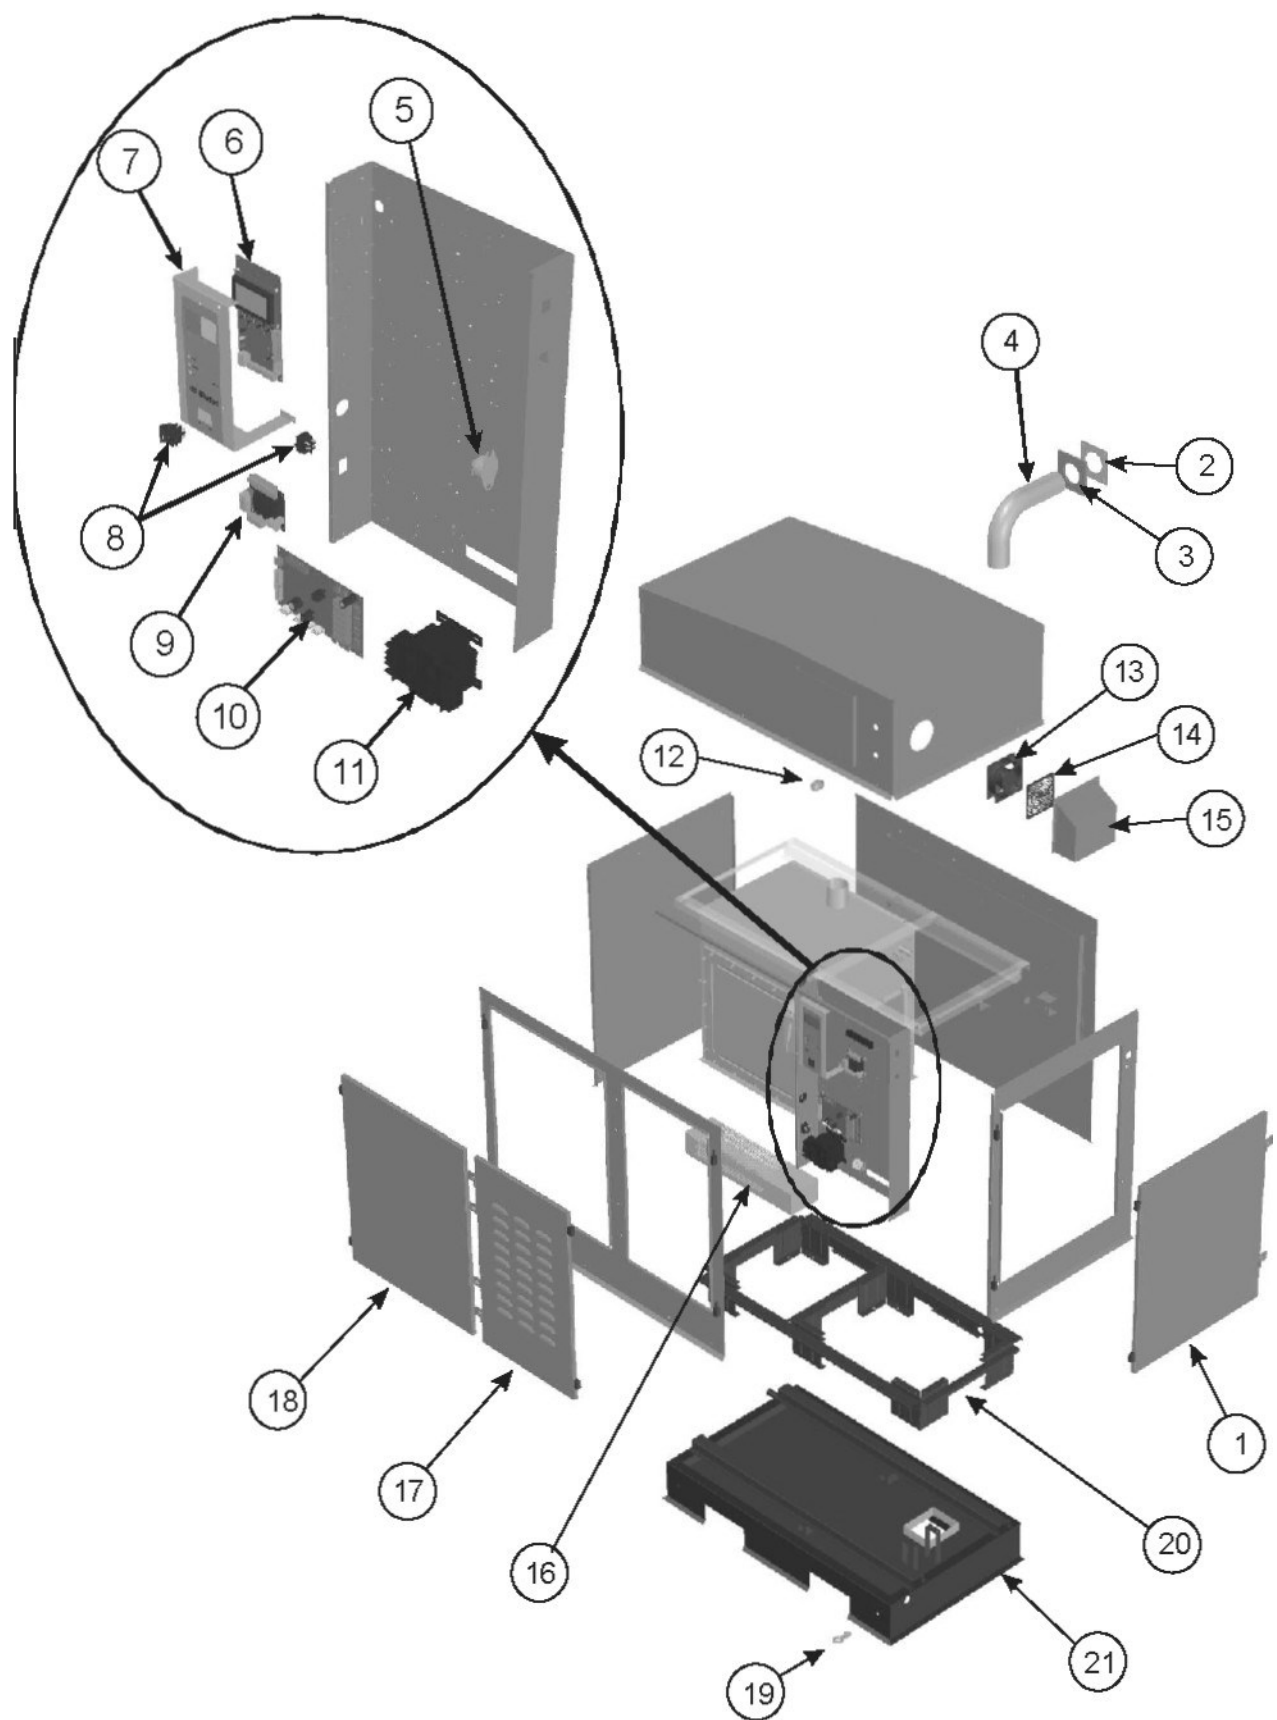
Condair SETC/P100- 050 Cabinet and Electrical Parts
